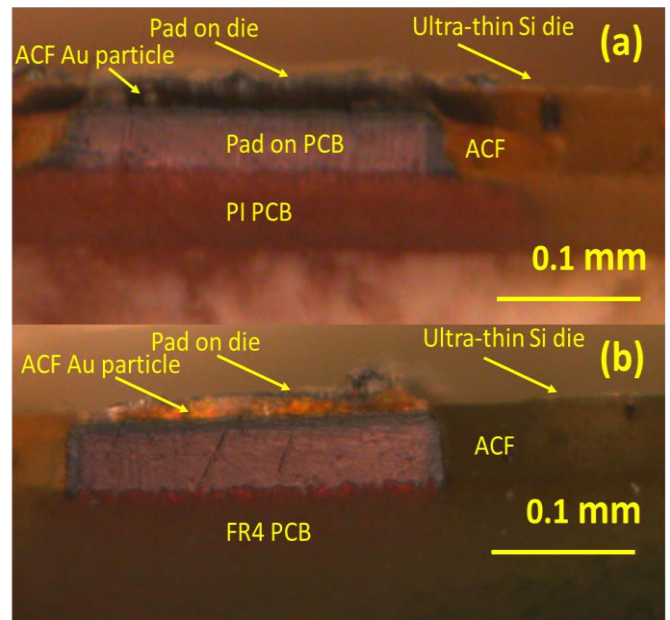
Cross-sectional view on ultra-thinned Si die ACF FC bonded samples on PI (a) and FR4 (b) PCB.
